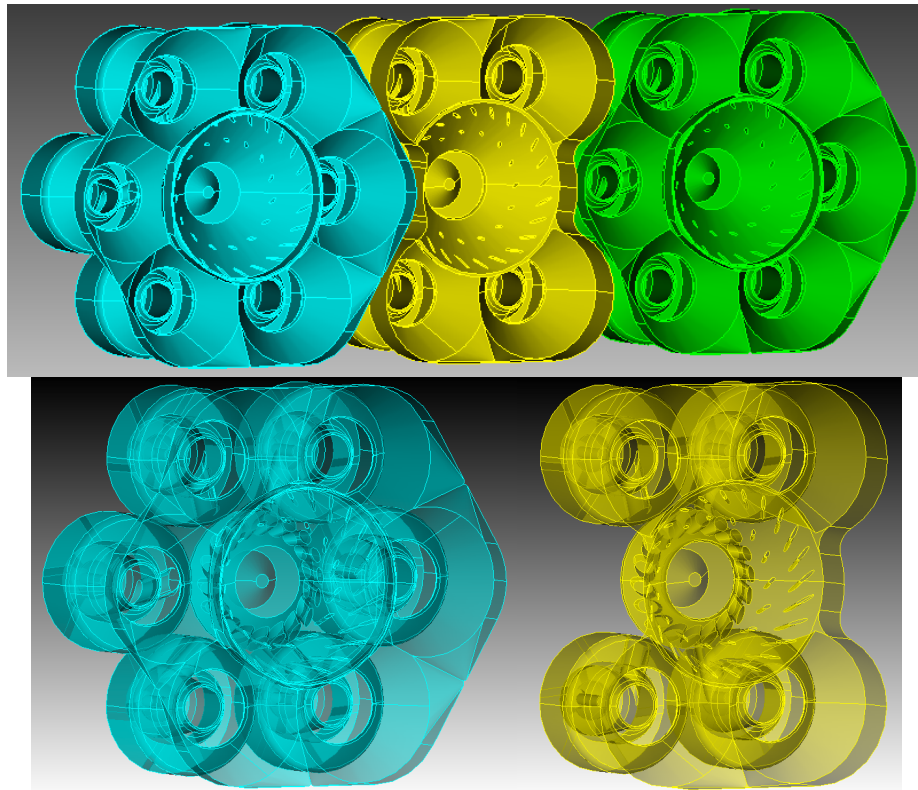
Dome-layout and CAD for a LDI-3 combustor with five- and seven-injection element arrays
